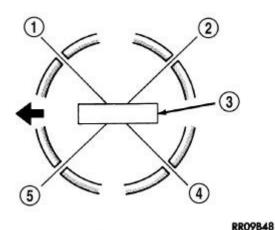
PISTON RING END GAP POSITION Courtesy of CHRYSLER LLC
